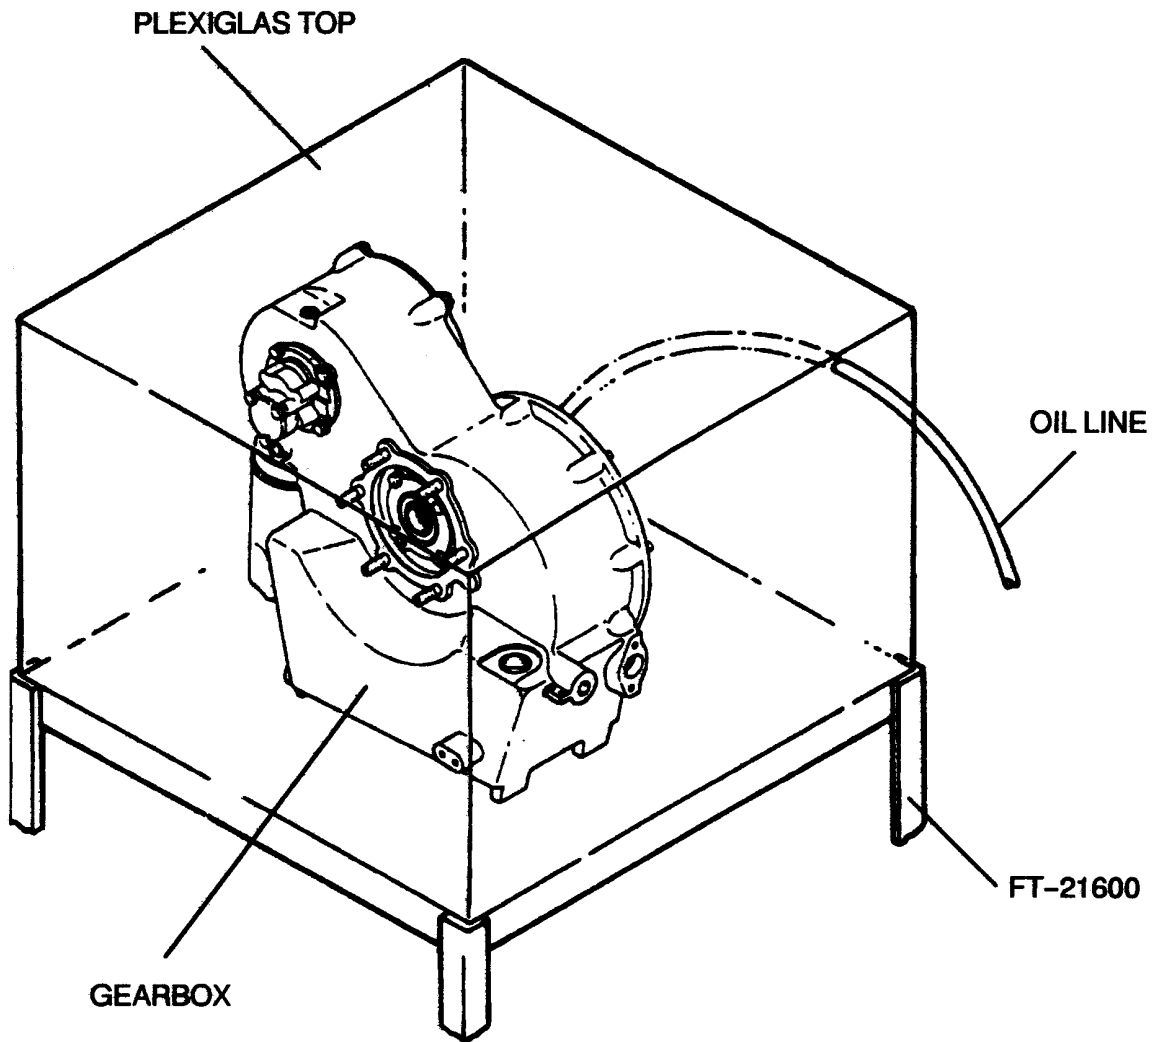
Using Oil Impingement Test Stand, Fabricated Tools FT-21600
